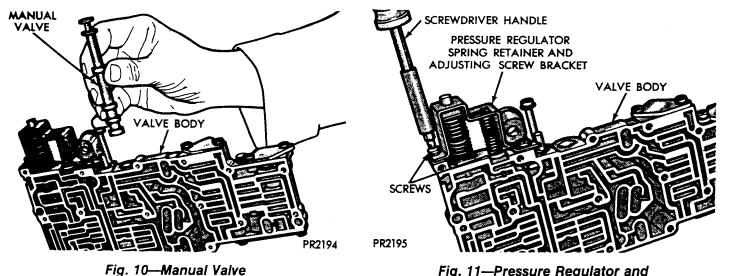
Pressure Regulator and Adjusting Screw Bracket
